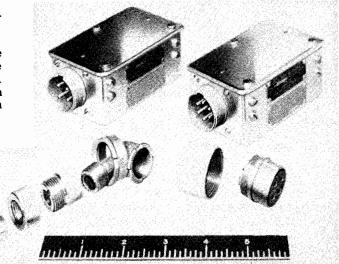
Jack Box BC-629-A, Jack Box BC-630-A - Assembled - Showing Cable Connector Construction
